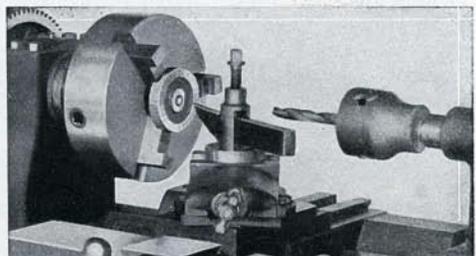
Drilling and Facing a Cast Iron Gear Blank Held in a Three-jaw Chuck
